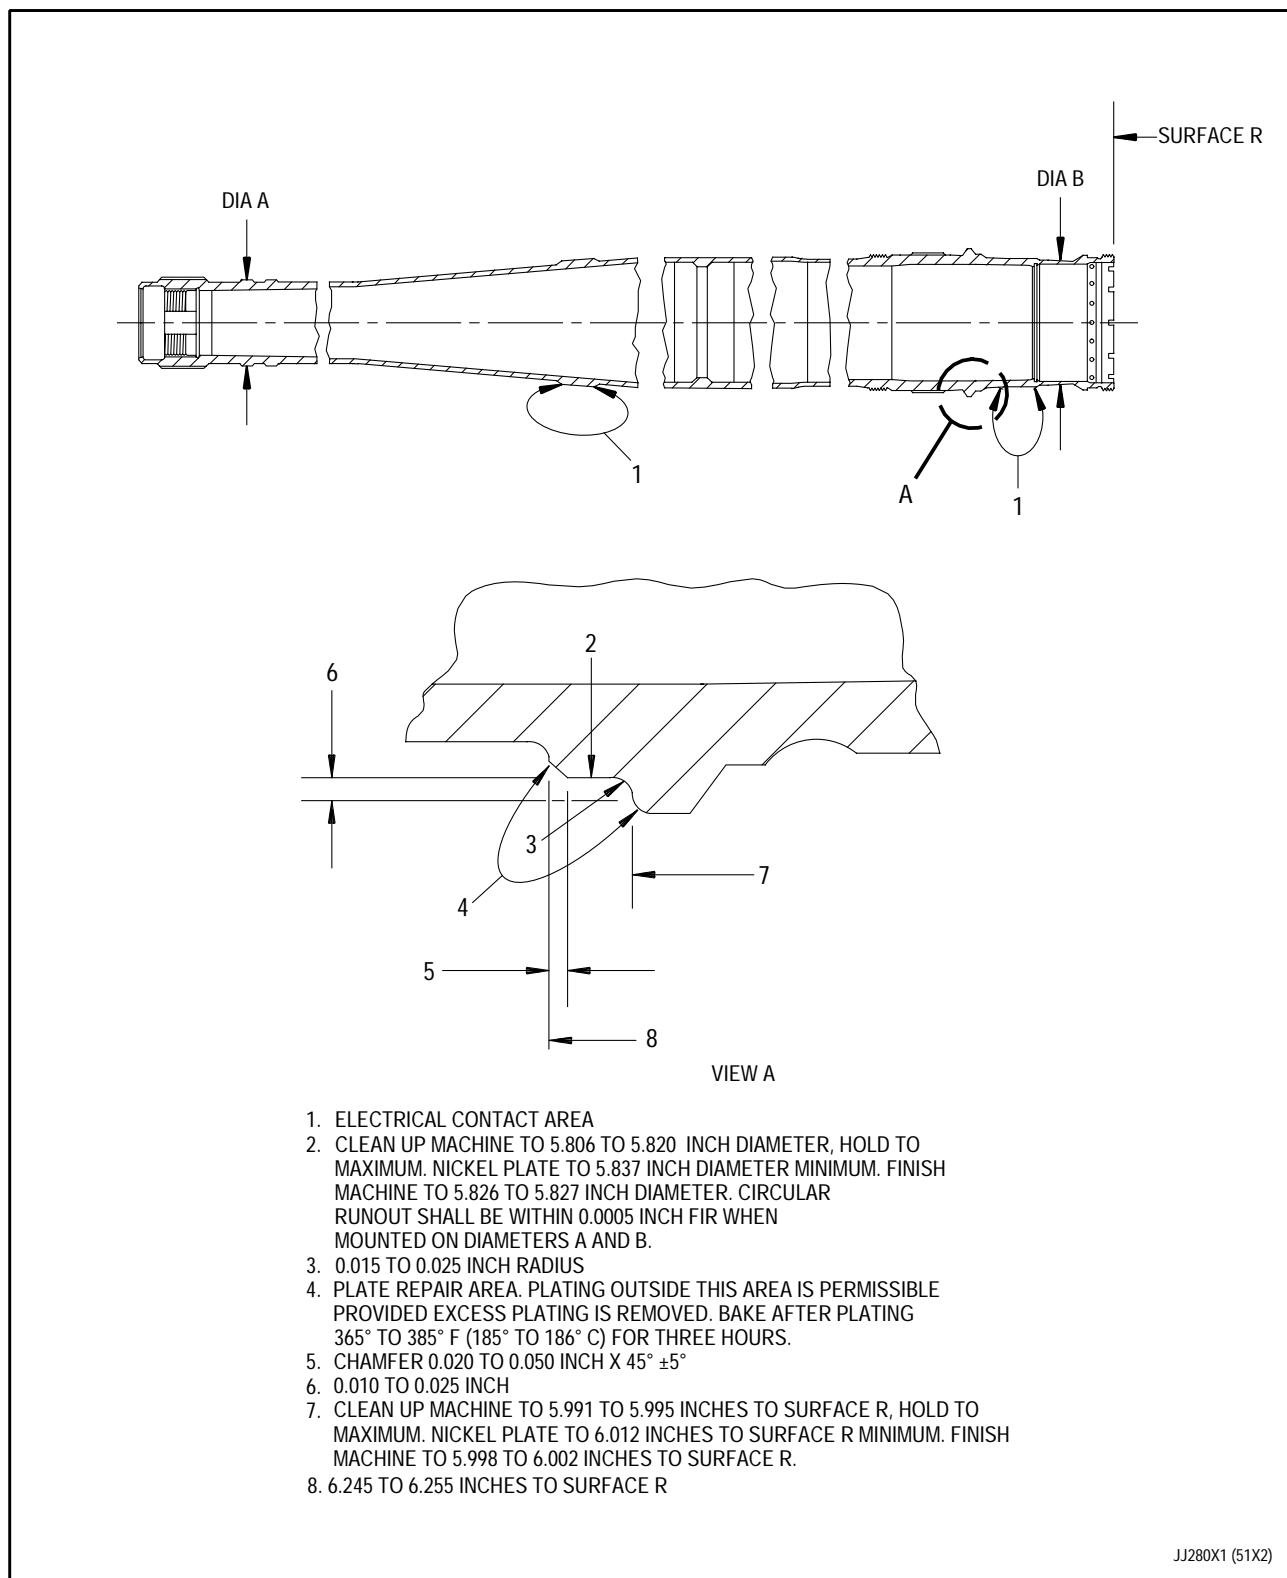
Front Compressor Drive Turbine Shaft - Rear Turbine Hub Rearward Snap Diameter Repair
